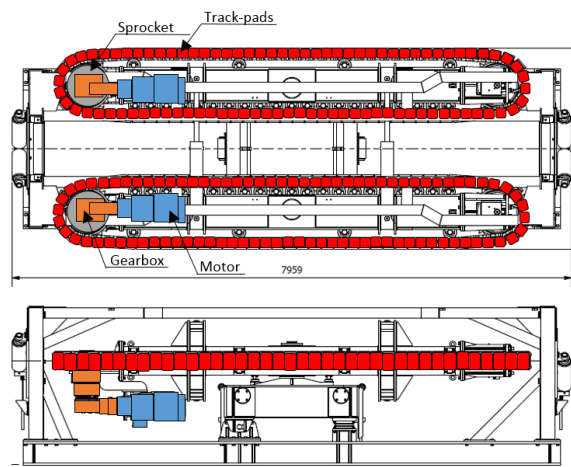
Highlighted in color, Red: track-pads, Blue: Motor, Orange: Gearbox, ref: Tideway Drawings
